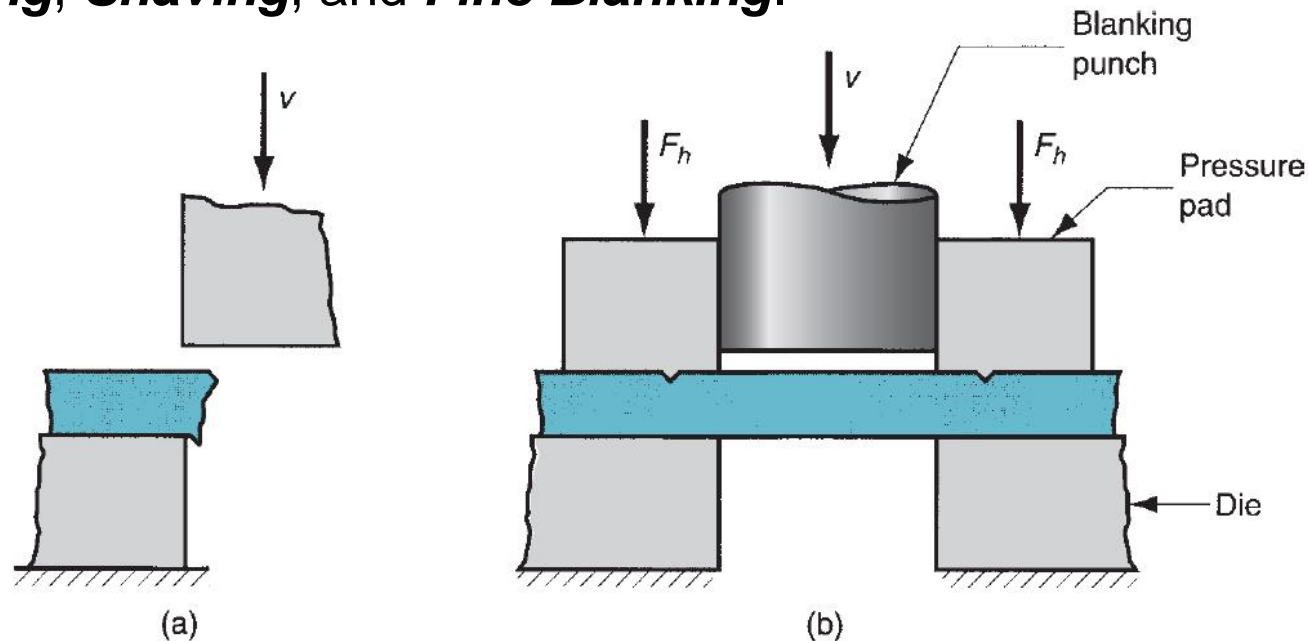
(a) Shaving (to cut unsmooth edges and get accurate dimensions) and (b) fine blanking (gives close tolerance and smooth, straight edges).
